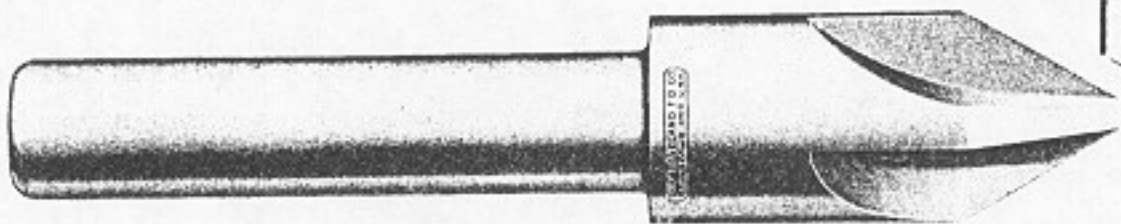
Machine Countersink. (Courtesy Cleveland Twist Drill Co.)
